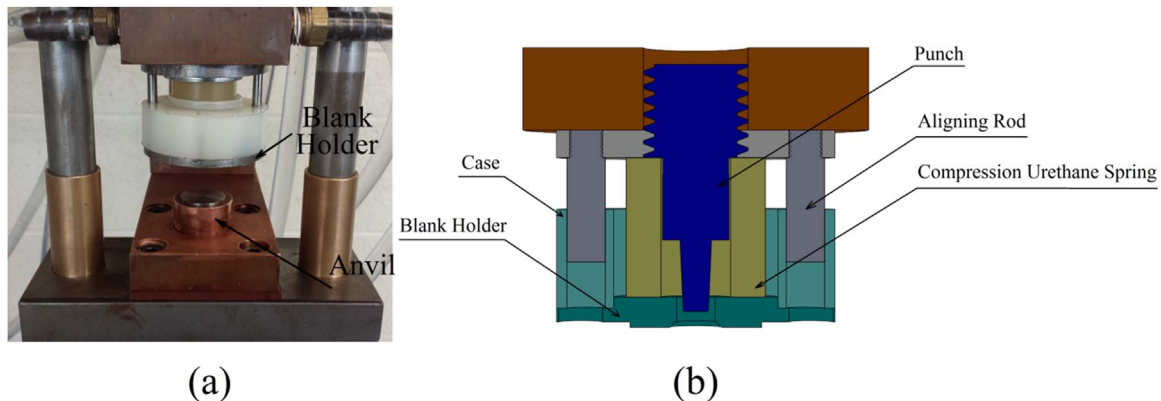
Die-less clinching tool set-up; (a) photograph for the installation of the tooling and (b) schematic drawing showing the punch, blank holder shape and compression urethane spring.
